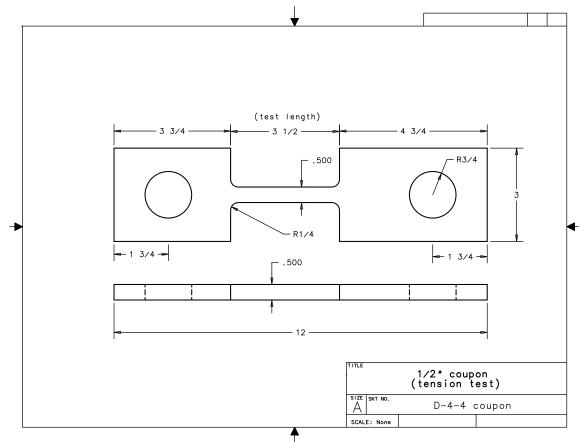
D-4-4 test specimen geometry for ½-inch thick plate material.
